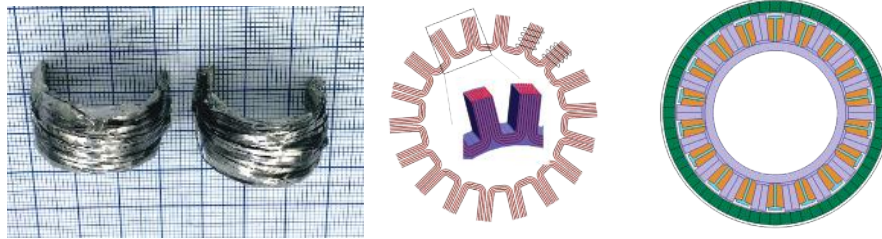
Demonstration of AMES wire bundle concept (left); wire bundle stator (mid); ORNL stator/rotor assembly (right)
